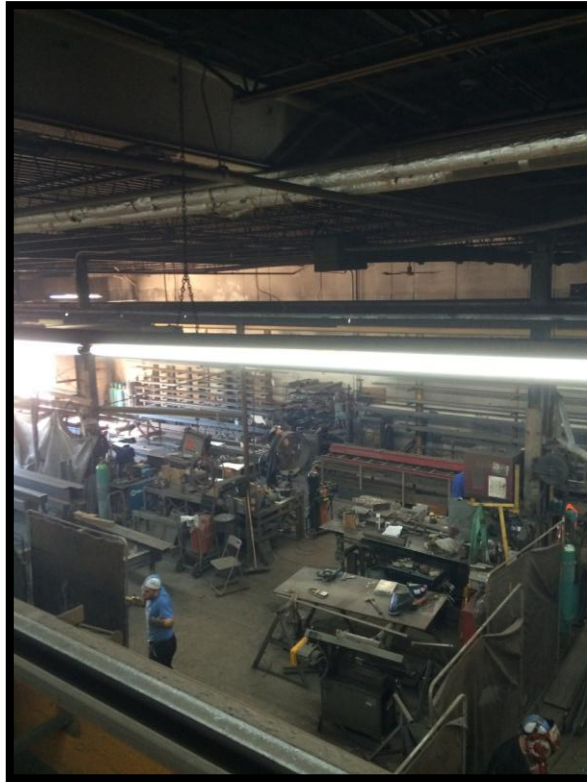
Steel storage area in southeast corner of property, looking southeast.
